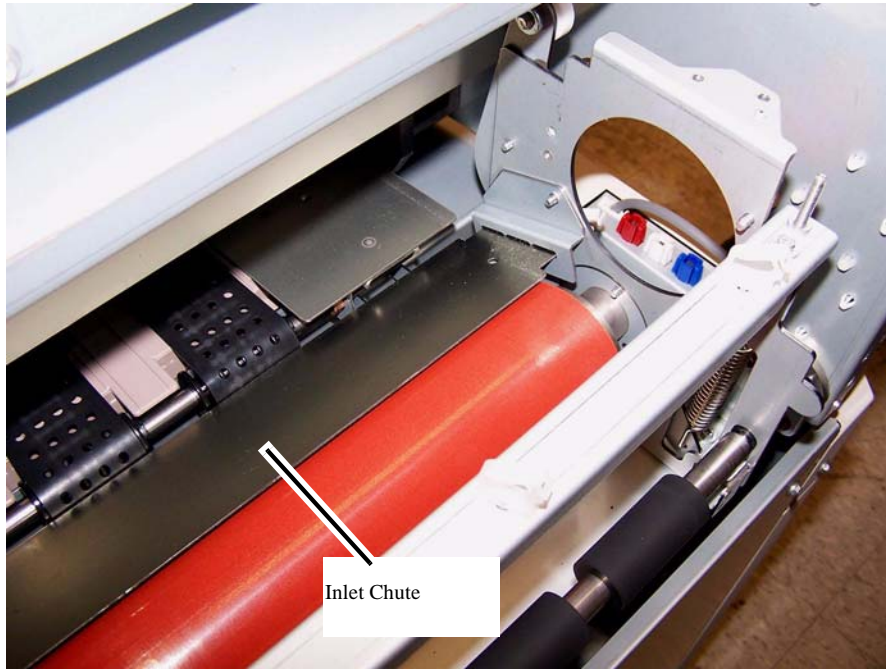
Inlet Chute location (shown prior to removal of Pressure Roll end components)
